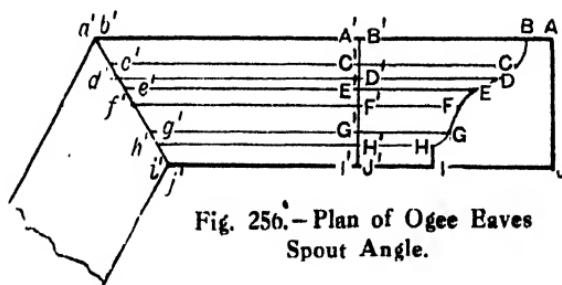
Plan of Ogee Eaves Spout Angle.
